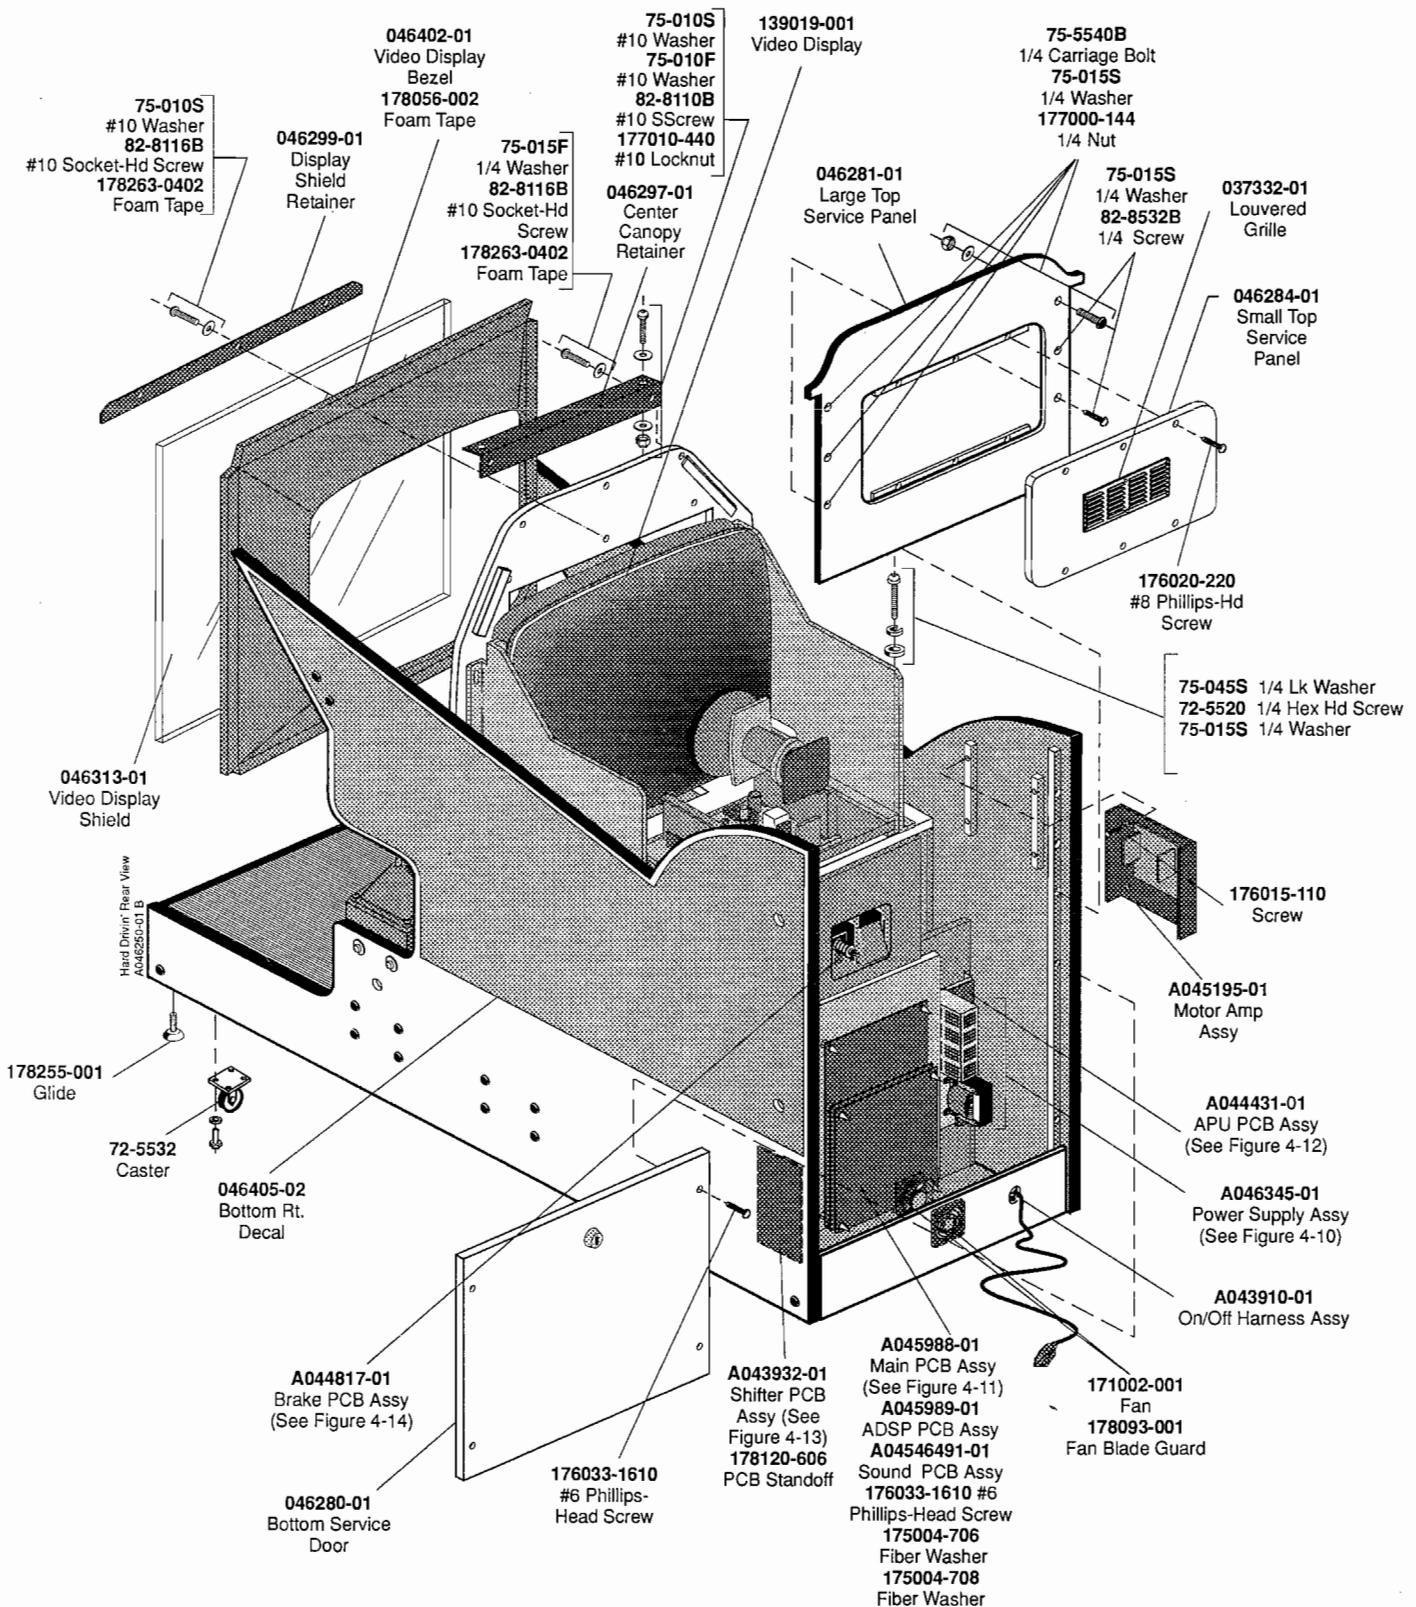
Cabinet-Mounted Assemblies, Front View
